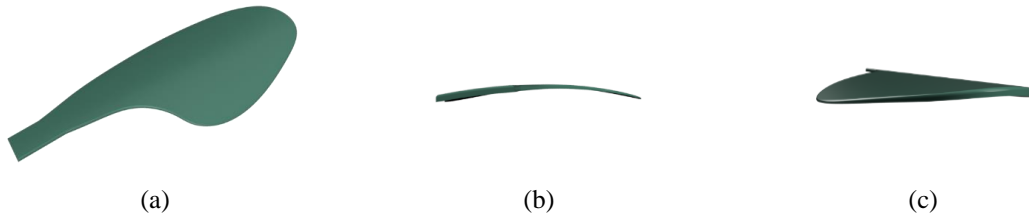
(a) Isometric view of final blade. (b) Side view of final blade. (c) Front view of final blade.
